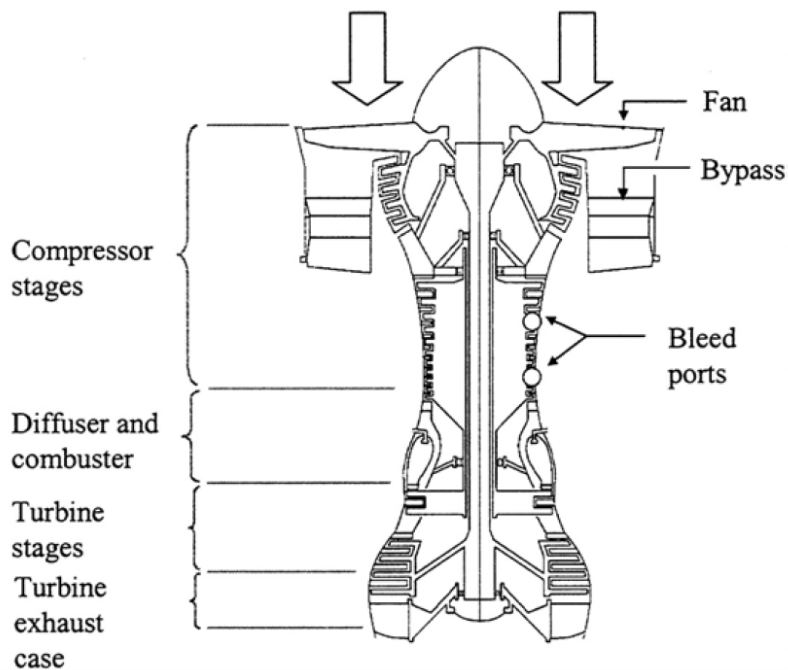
Bleed air valves positioned with respect to engine bearings. The engine has 5 bearings of which 3 bearings are upstream of the bleed air valves. (NRC 2002)
